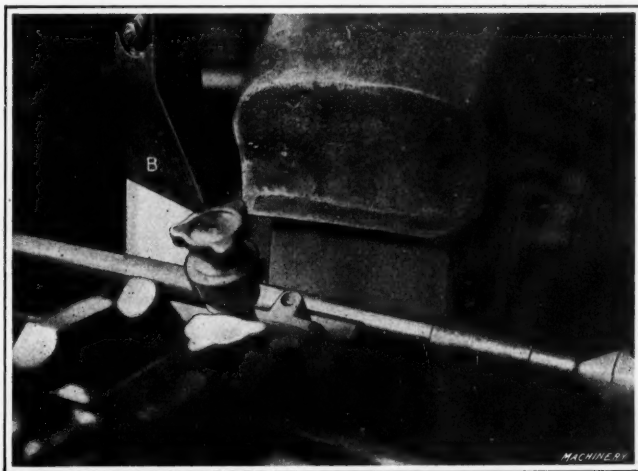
Grinding a Ford Rear Axle in Norton Special-purpose Plain Grinding Machine
